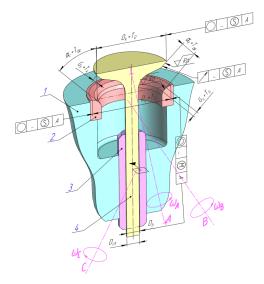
Parameters of conjugation of the assembly unit surfaces:
